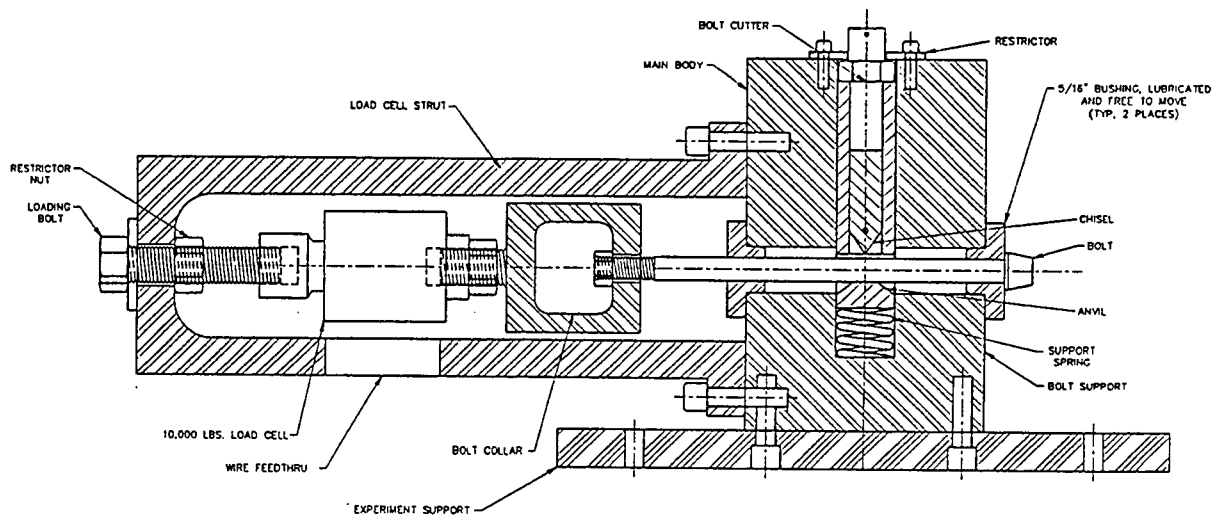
Schematic of test fixture for severing bolts and applying desired preload.
